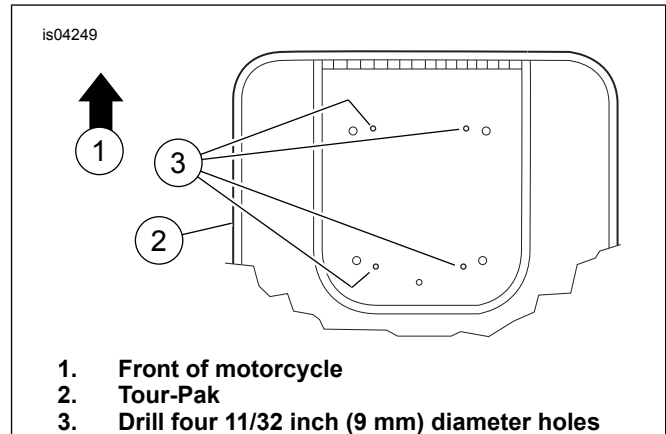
Drill Attachment Hole Locations in Tour-Pak
